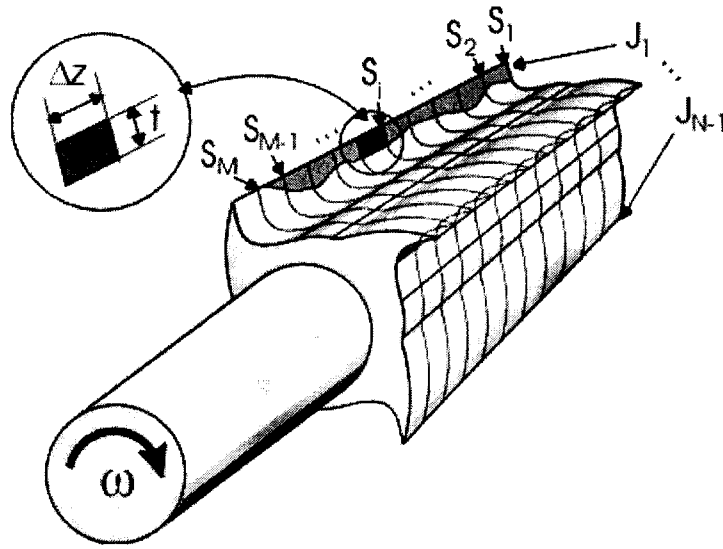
A milling tool with J_N cutting flutes and S_M axial segments
